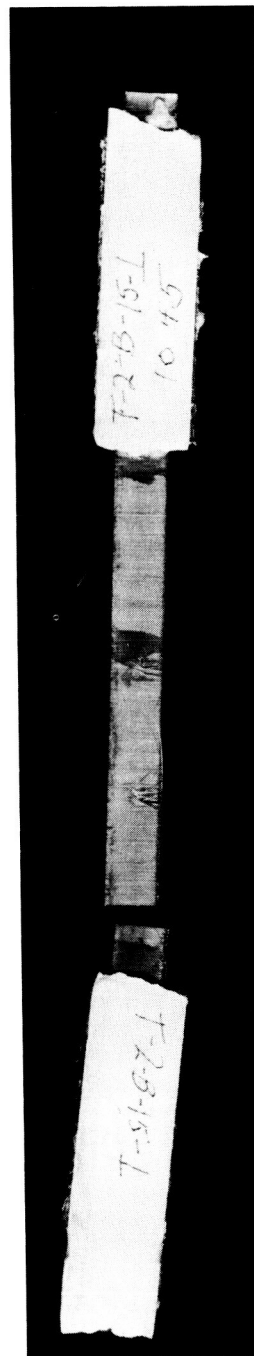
WIRE SHEET TENSION SPECIMENS
